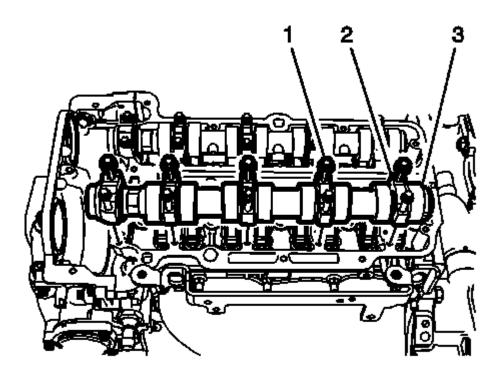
Camshaft Bearing Caps And Bolts Courtesy of GENERAL MOTORS COMPANY
